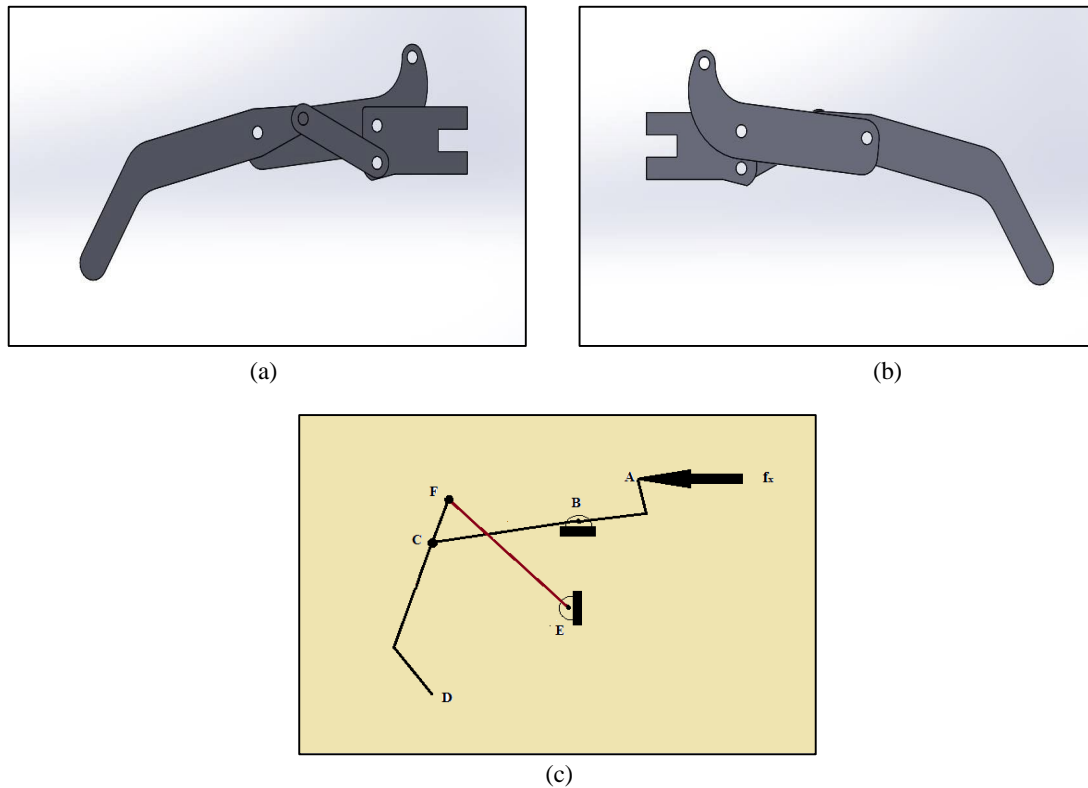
Finger design of type 2; (a) left hand side view, (b) right hand side view, (c) kinematic diagram
